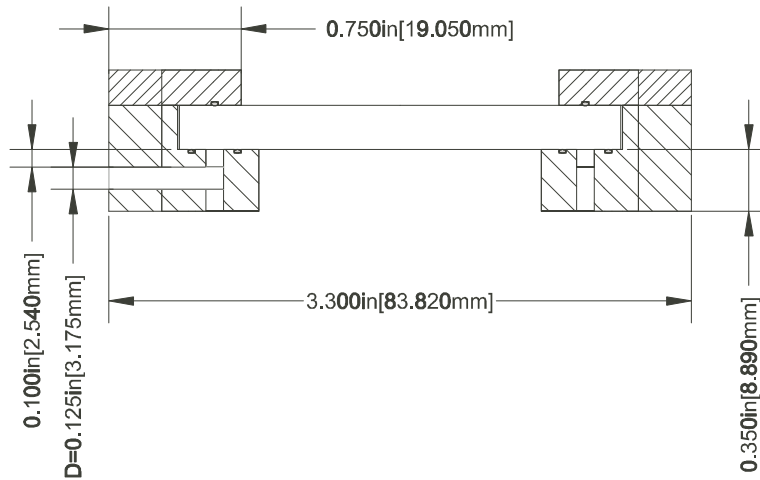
The cross-sectional view of the clamping and blank flanges
